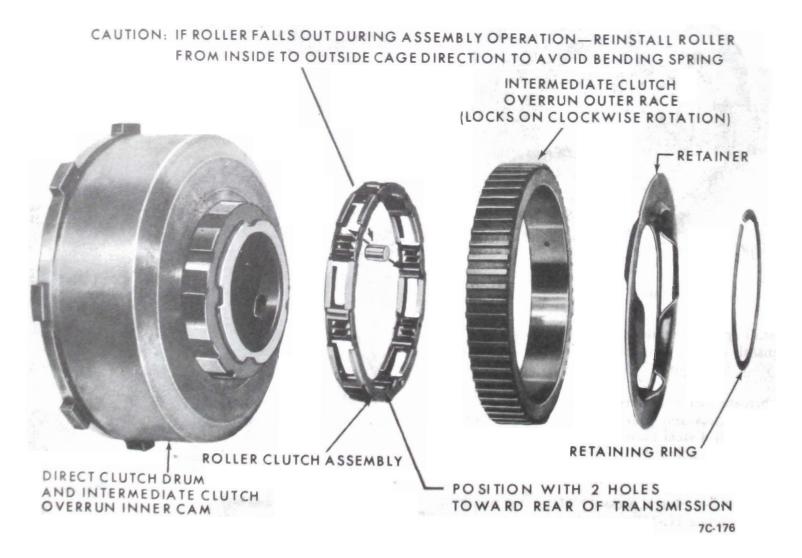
C-179 - Intermediate Overrun Roller Clutch Assembly
